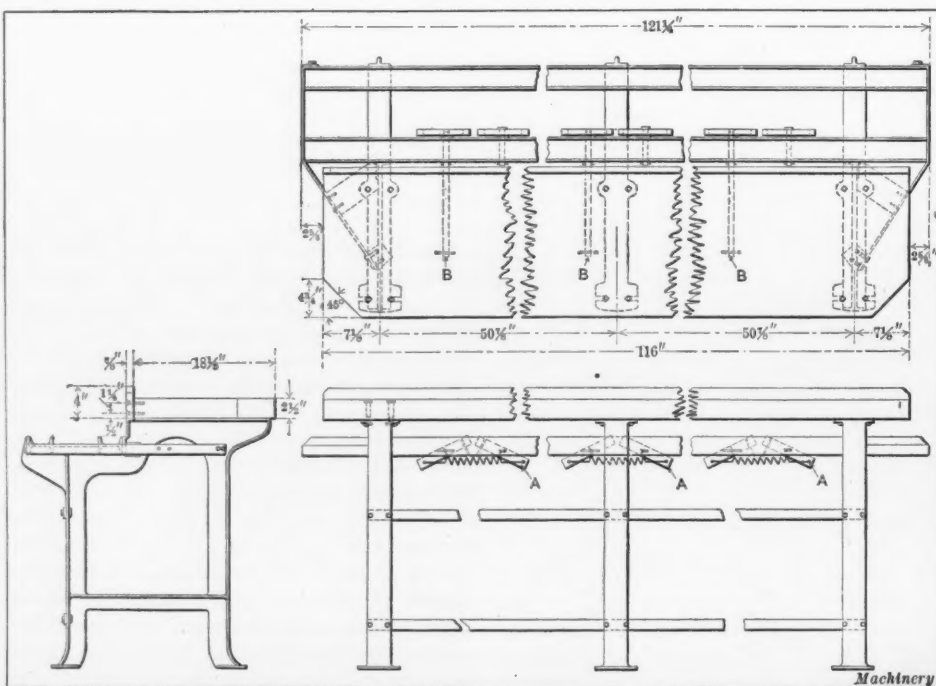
Design of Shaft Assembling Bench—note Locking Device for holding Bench Trucks in Place
